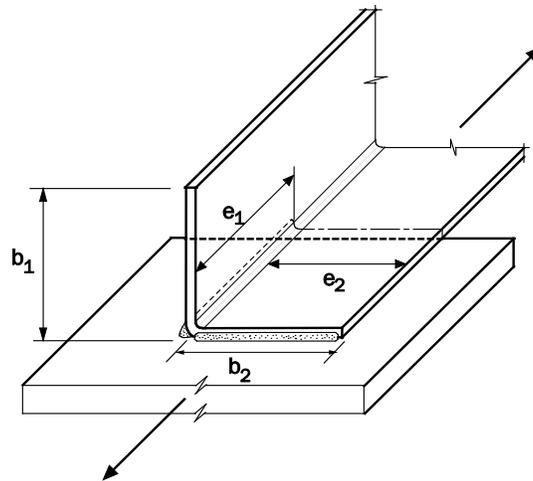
Potential Failure Path of Fillet-Welded Joint (Tension Rupture)
